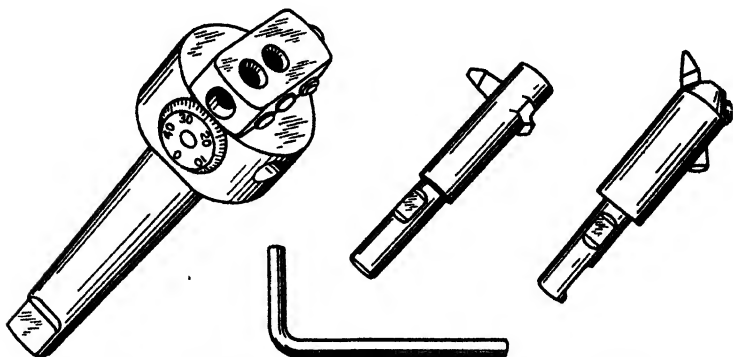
Parts of an adjustable boring head. (C. C. Crayley Manufacturing Company)
